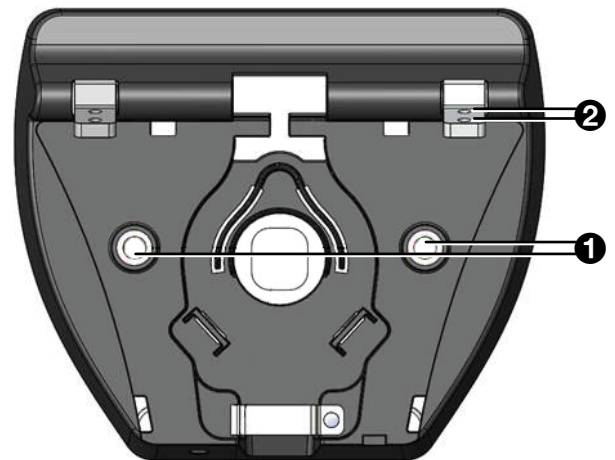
Mounting Holes in TLP Pro 1225TG Base
